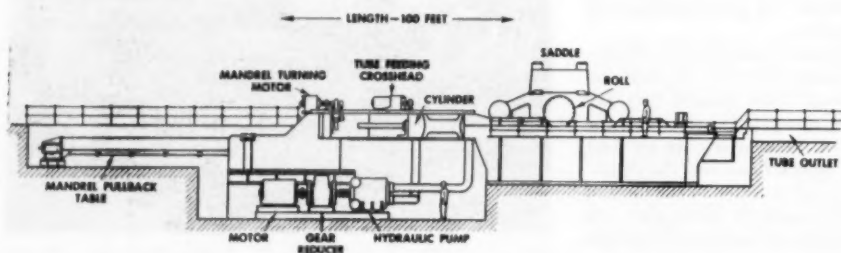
SKETCH SHOWING PRINCIPAL SECTIONS OF GIANT TUBE REDUCER
